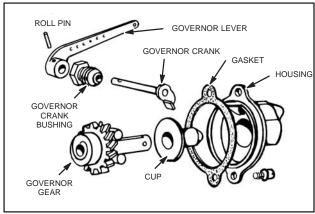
GOVERNOR HOUSING AND GEAR ASSEMBLY
